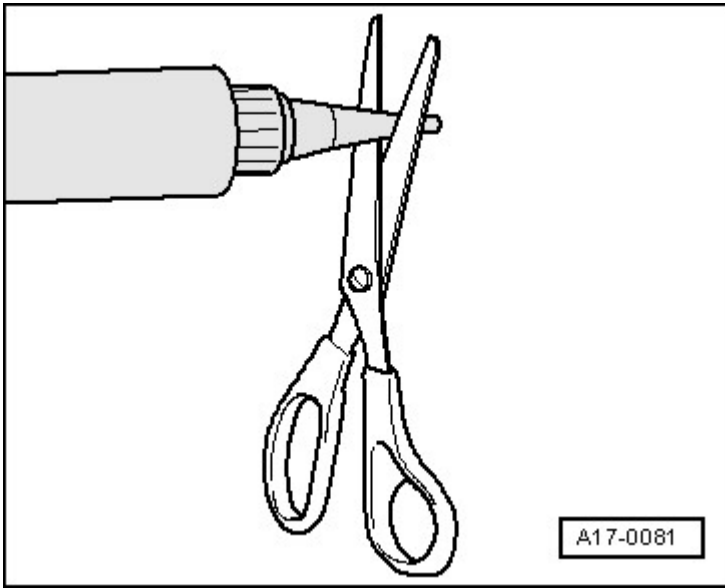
Cutting Tube Nozzle At Front Marking (Nozzle Diameter Approx. 2 Mm)
